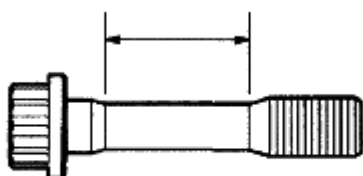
Measuring Tension Portion Diameter Of Bolt Using Vernier Calipers
